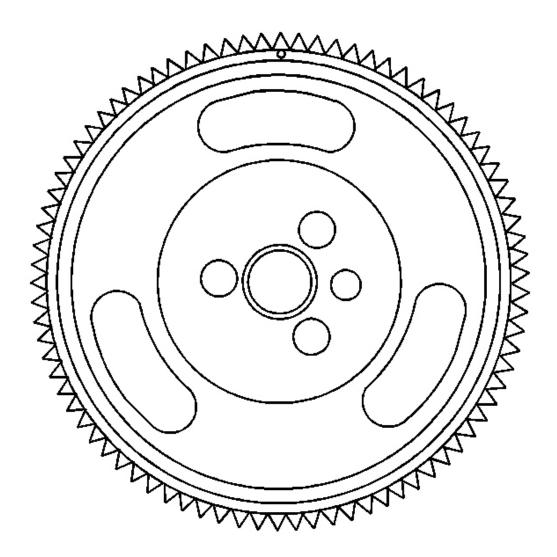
Balance Shaft Drive Gear Camshaft Timing Mark Courtesy of GENERAL MOTORS CORP.
